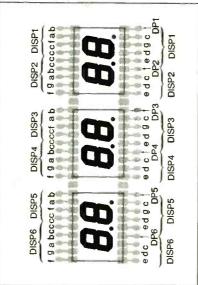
DISPLAY BOARD parts-placement diagram. Solder lead wires to the appropriate pads for connecting the display board to the main board. if not, remove power and double check the wiring and component orientation. This procedure should locate the problem; if not, reconfirm the +12 volt DC connections. As a last resort, try replacing the ICs.
